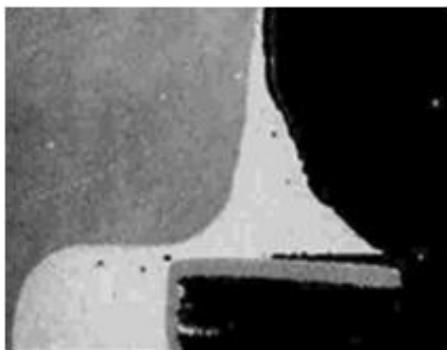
Lift-off defect between Cu pad and Pb-free solder²⁴⁾
